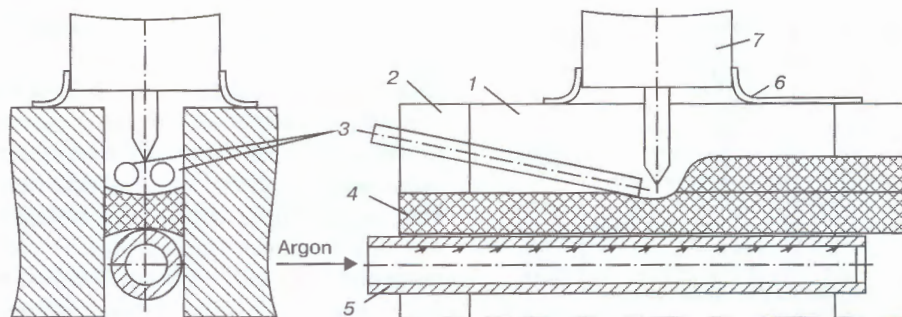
Scheme of manual non-consumable argon narrow-gap arc welding: 1 — part to be welded; 2 — run-out tabs; 3 — filler; 4 — deposited metal; 5 — device for blowing; 6 — shield-reflector; 7 — torch nozzle
